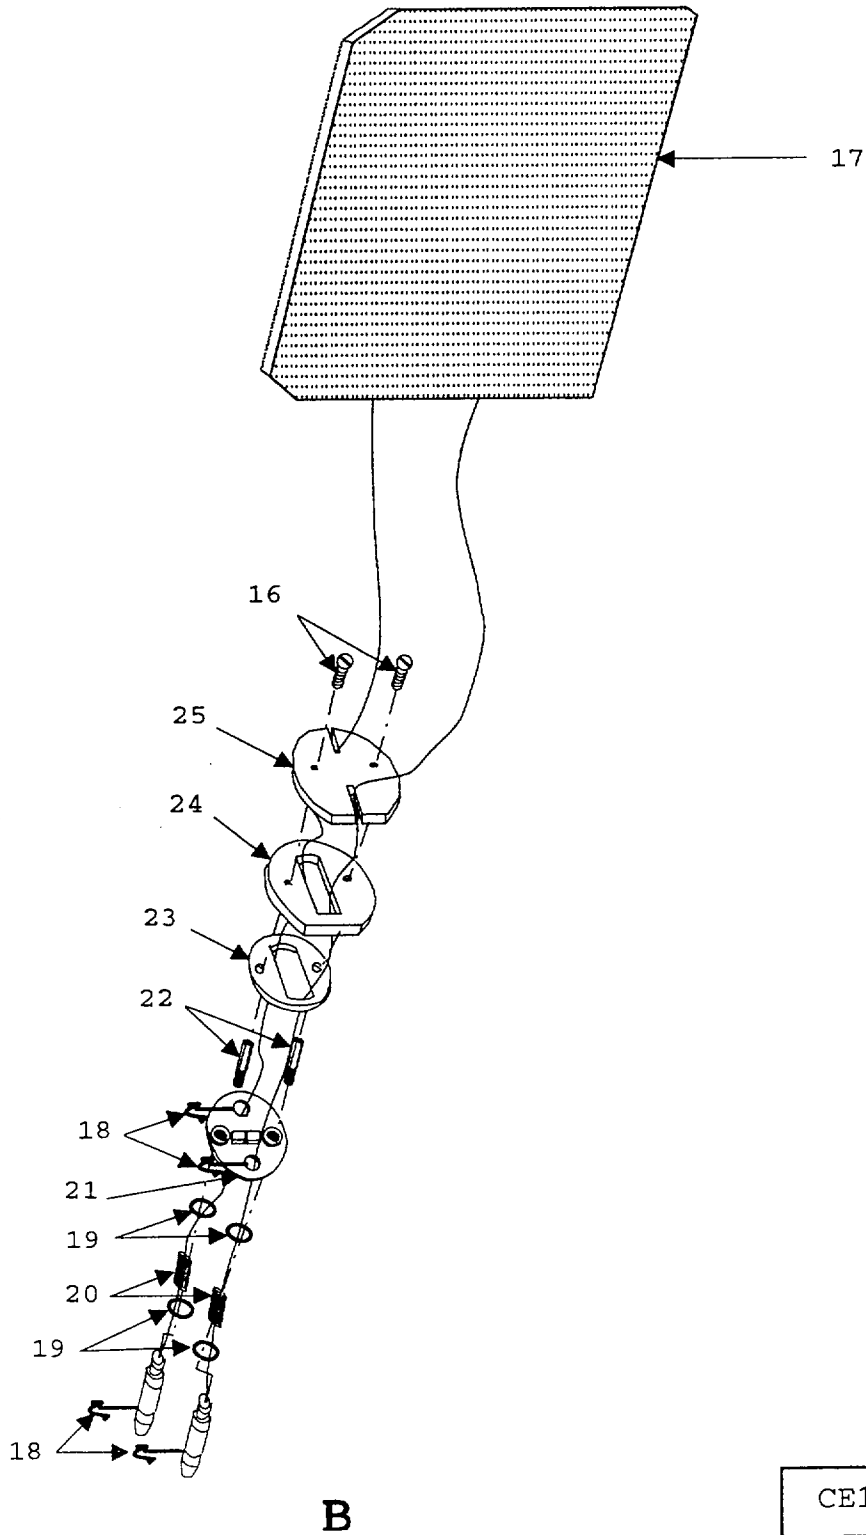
Panel Assembly (Sheet 3 of 7).
